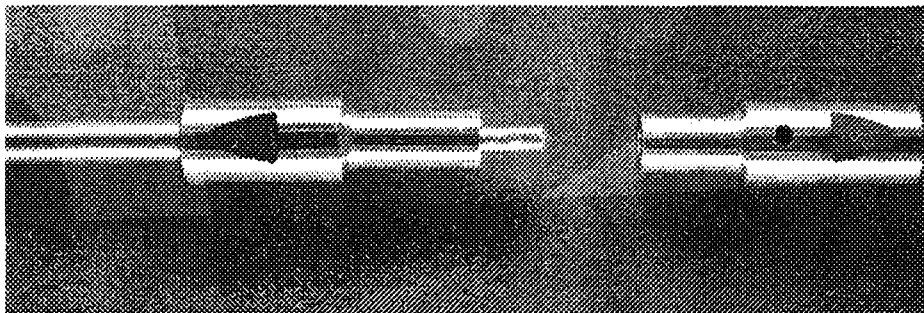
b Picture of punches and inner rod to compress a doughnut-shaped tablet.
